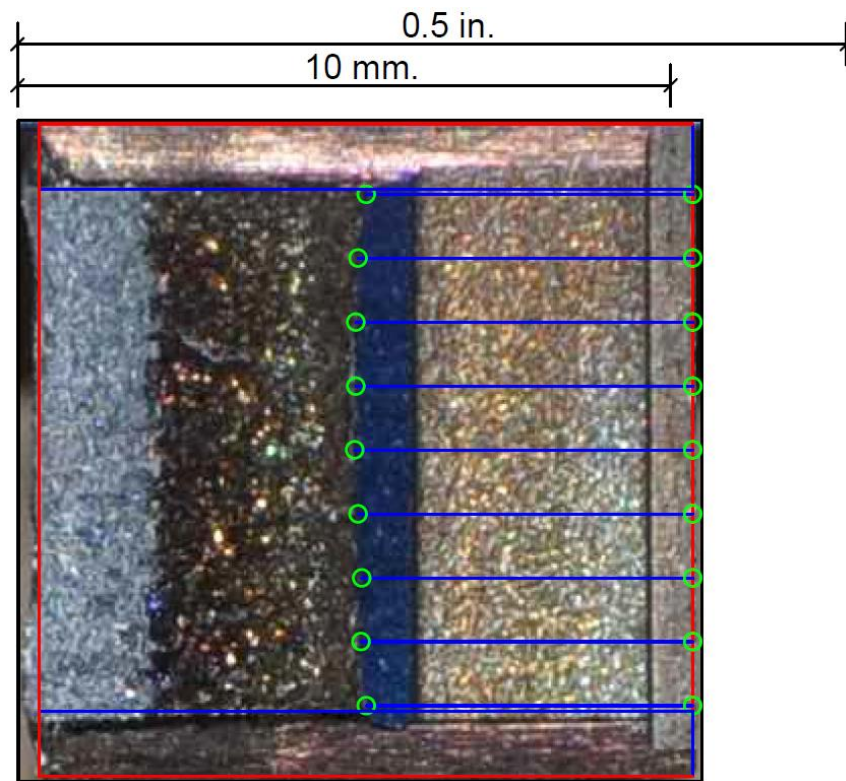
Specimen P3' Fracture Surface
